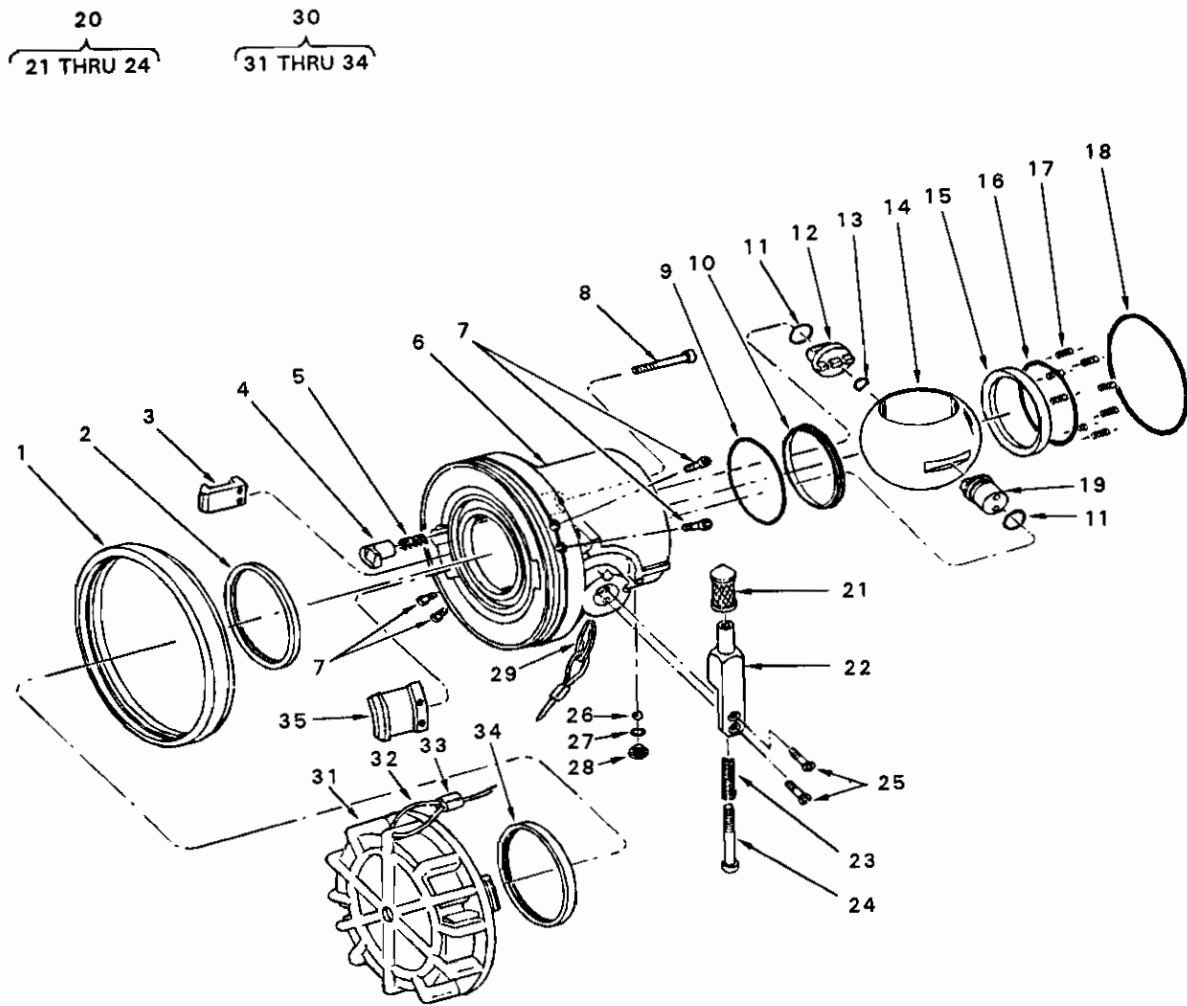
Coupling, Unisex, 2-Inch, Valved
